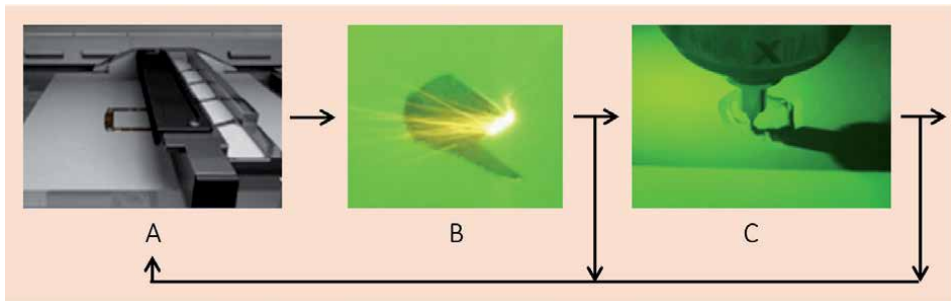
Stage 3: additive manufacturing, (A) recoating, (B) laser sintering, and (C) CNC machining.
